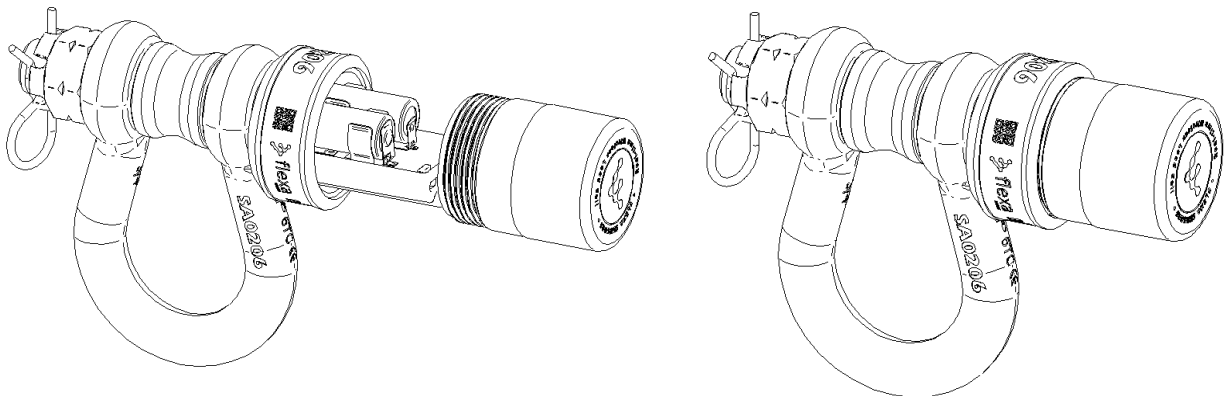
Shackle Load Cell – PCB enclosure closing
